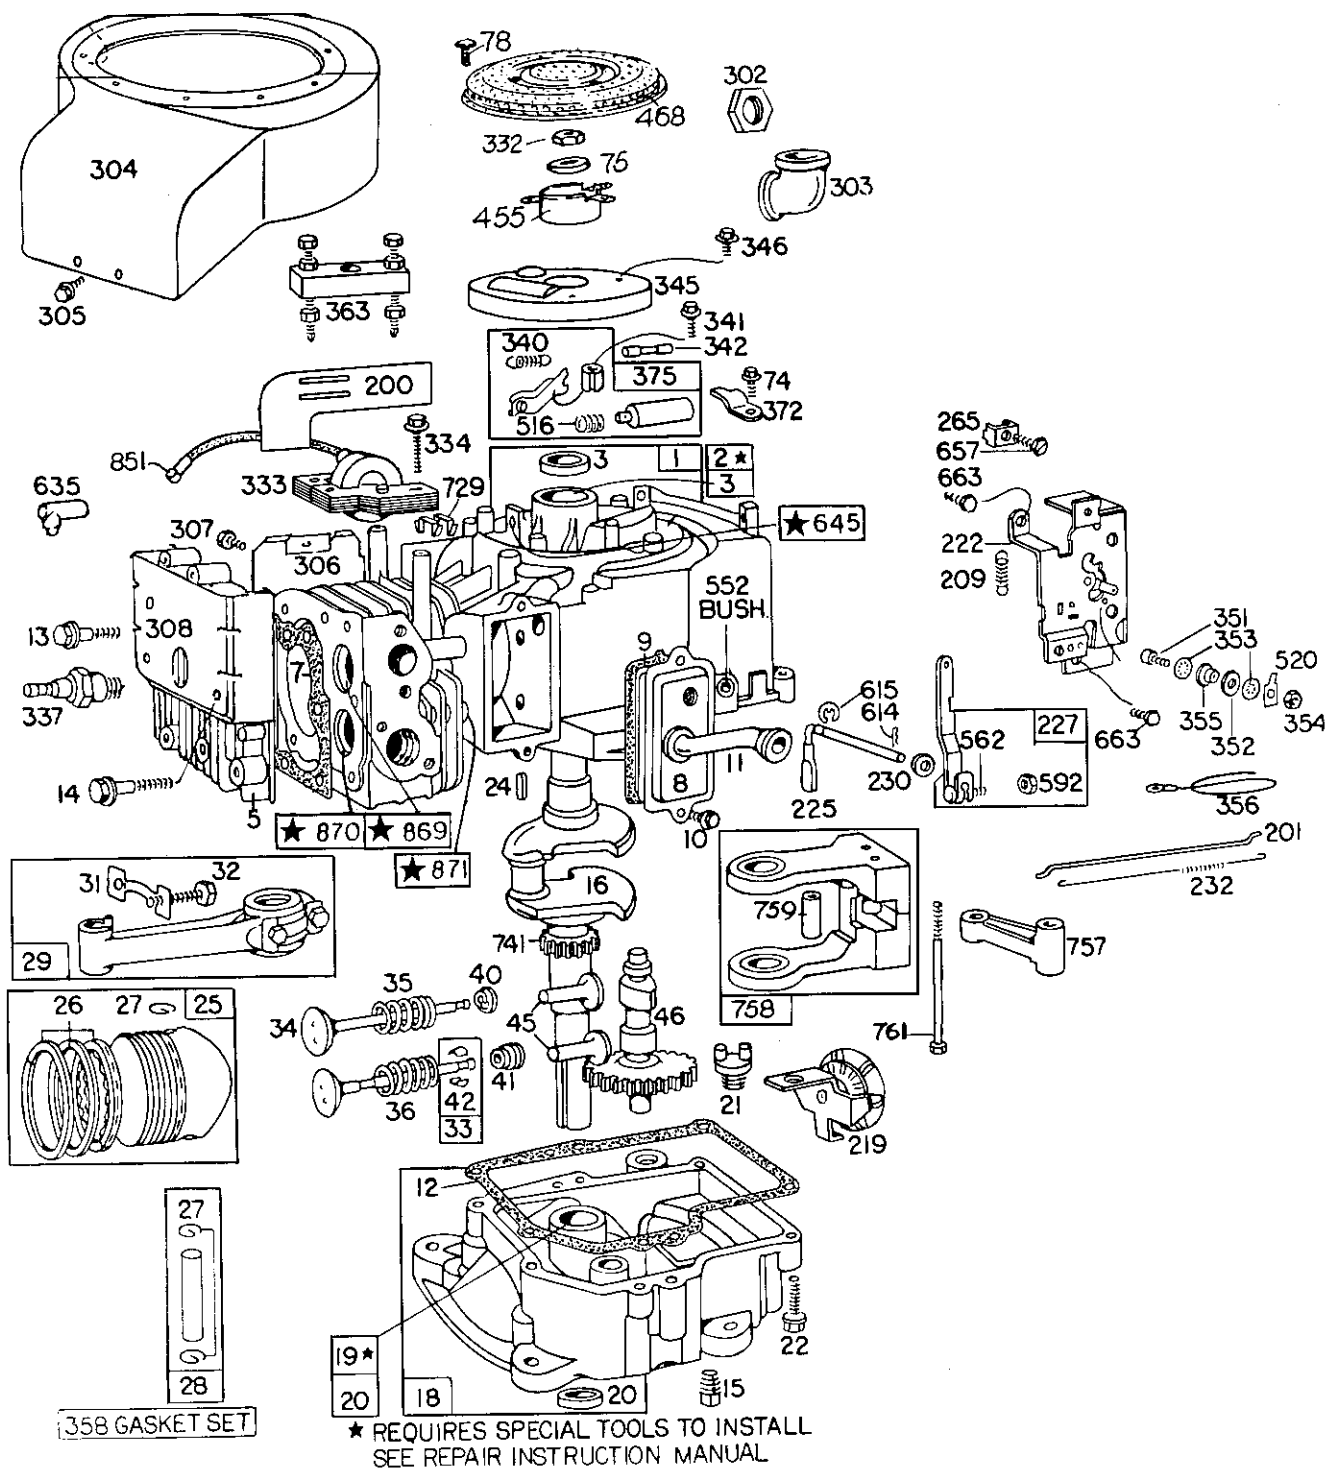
MODEL 814 (BRIGGS & STRATTON ENGINE ASSEMBLY 191707-5651-01)
